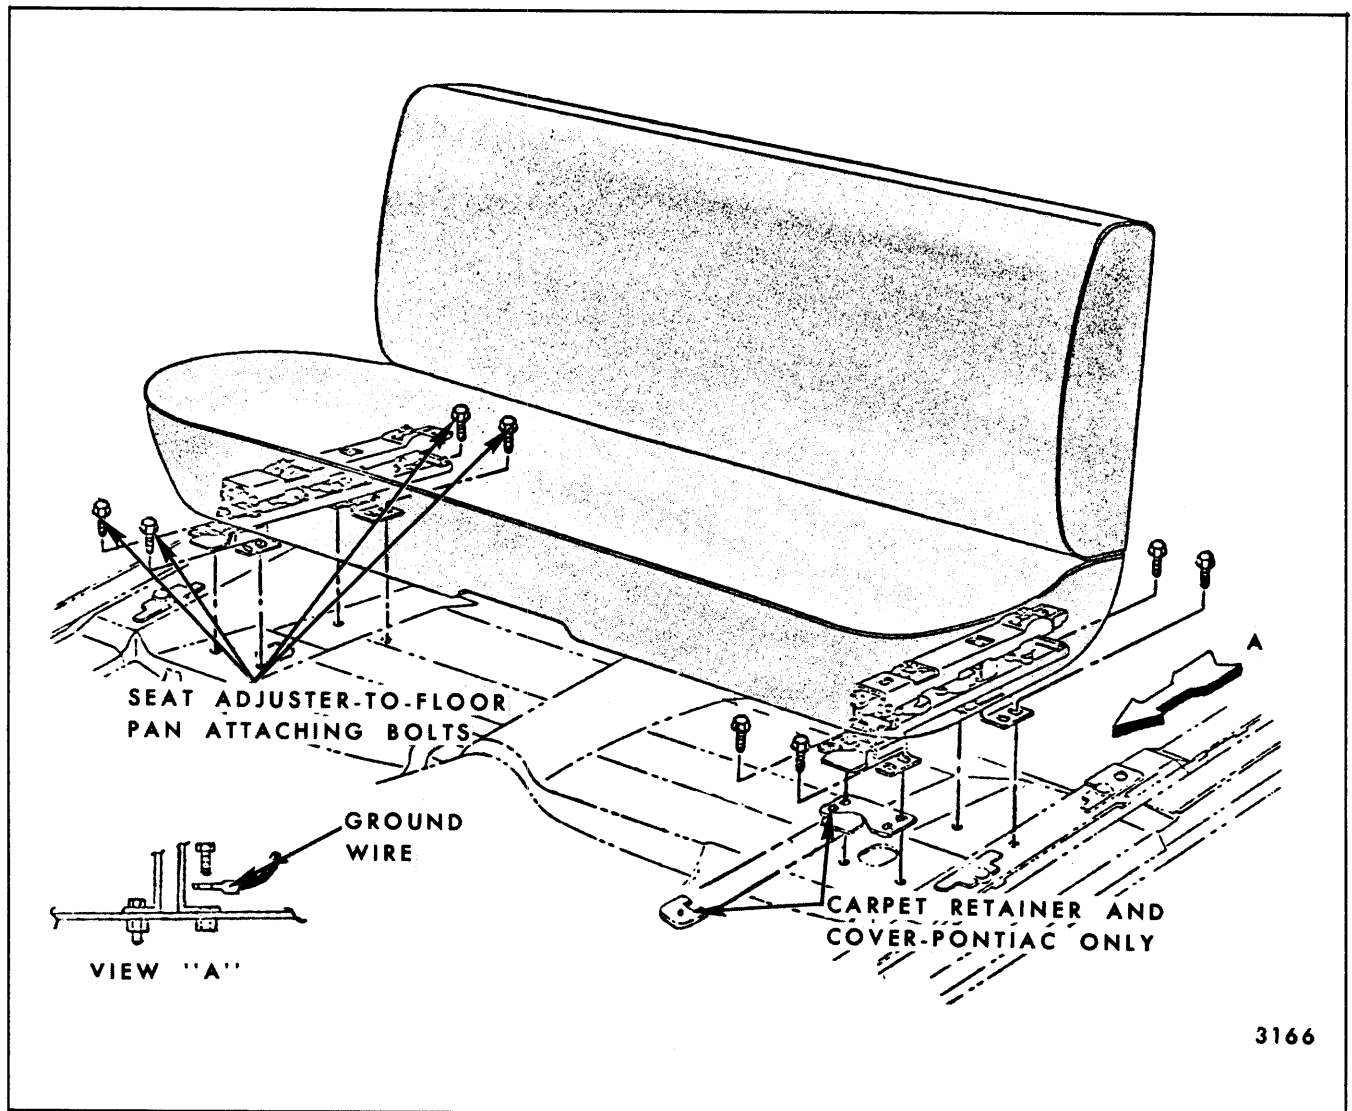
Seat Adjuster Floor Pan Attachment - Full Width Standard Seats (Power Six-Way Shown - Two-Way and Four-Way Typical)
